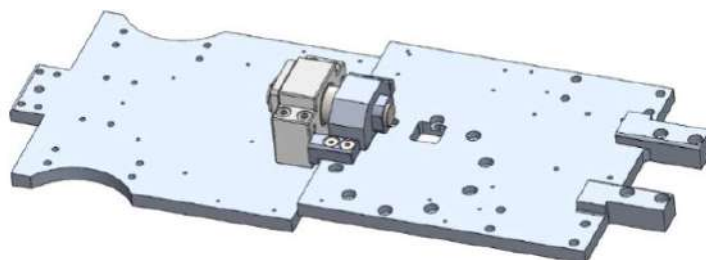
Frame of the mobile platform which consist of two parts- bottom view
